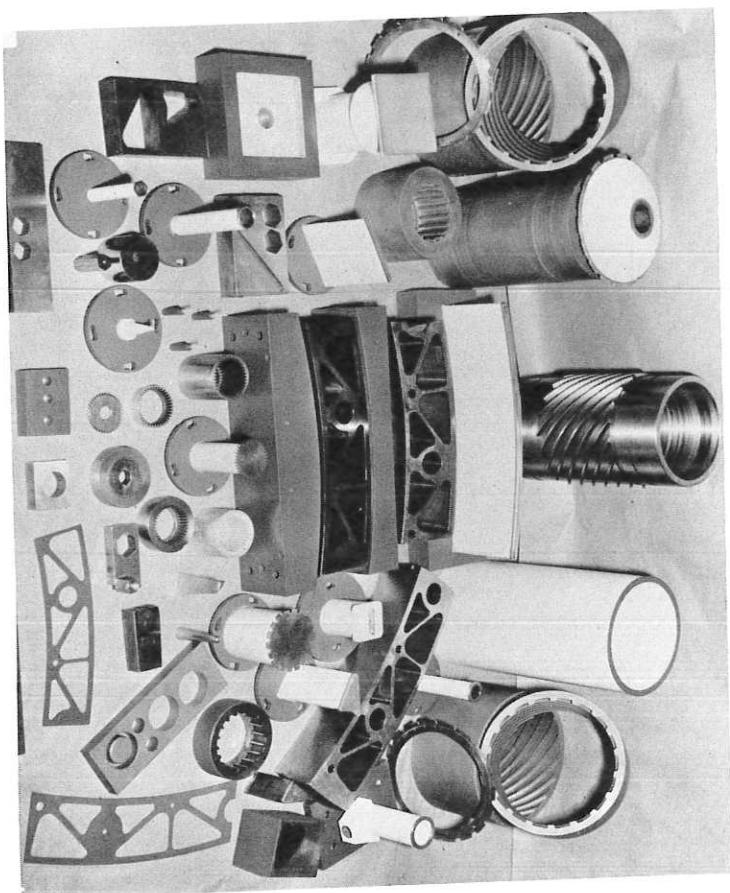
Variety of components, test pieces, and the ECM tools that produced them. The helical splined gears are generated with a tool having combined axial and rotational motions. (Courtesy of LTV Vought Aeronautics Division, LTV Aerospace Corp.)
